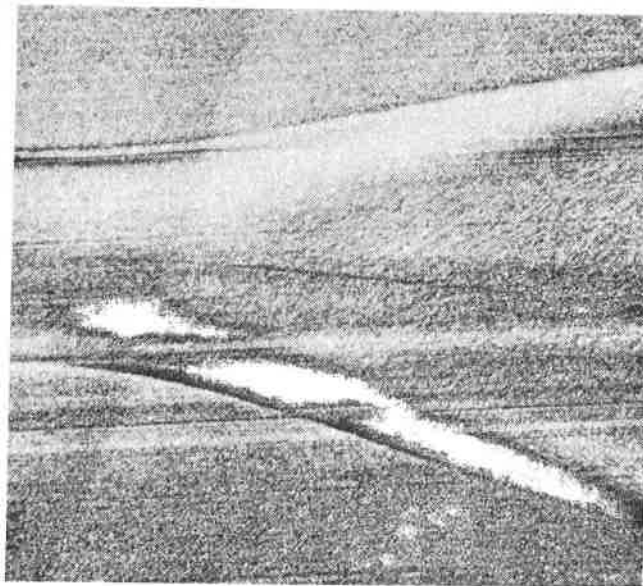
Distinct interface along the center of a fused seam weld zone.
